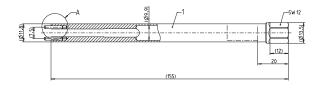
Mounting wrench ø11,8/SW12 Type 1300A73 for mounting bore ø12 mm
